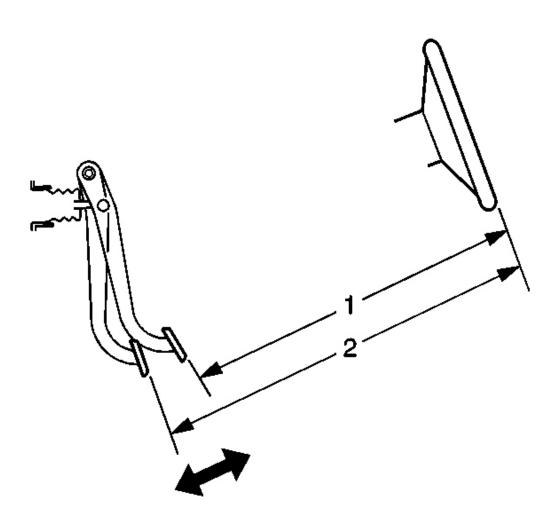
Measuring Brake Pedal Travel Courtesy of GENERAL MOTORS CORP.
